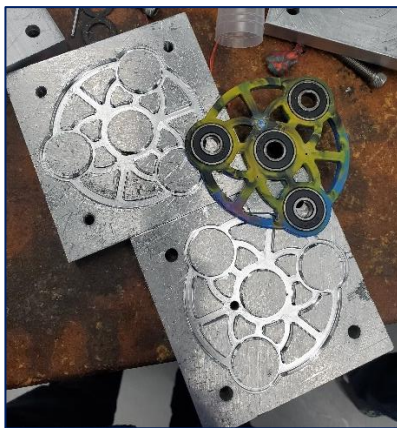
Aluminum Mold and plastic injected fidget spinner with ball bearings
